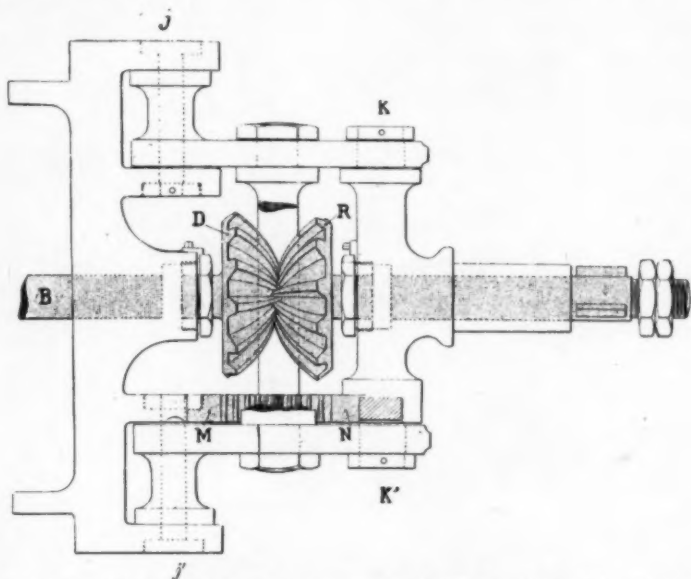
Detail View of the Gears. *B*, Motor-Shaft carrying the Gear *D*. *R*, Gear carried by the Spindle. *M* and *N*, Guiding Segment-Gears. *KK'*, Pivoted Mounting of the Spindle. *jj'*, Pivots for permitting the Swinging of the Wheel relatively to the Motor-Shaft.
